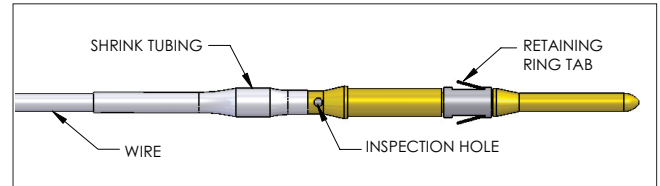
Figure C. The shrink tubing must be adjacent to, but not cover, the inspection hole.
